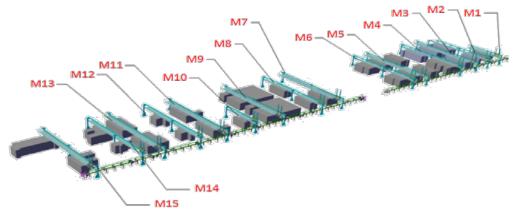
Production line equipment layout (M1-M15 is production unit)
